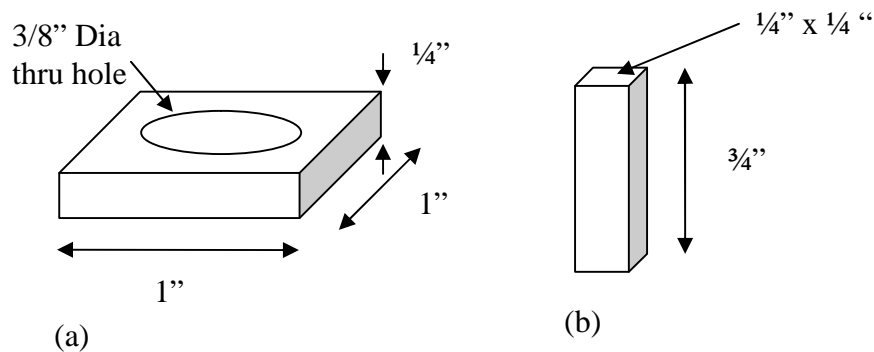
The dimensions of the Zn-27% Al brazing alloy parts used for sealing cans filled with Al-10.5 Mg powder (a) for the can top, (b) for the plug inner hole.
